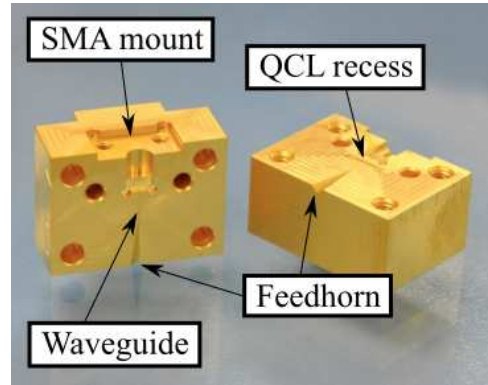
Micromachined 3.5-THz QCL waveguide block assembly, with the diagonal feedhorn, rectangular waveguide, mounting-point for an electrical SMA connector and the QCL-mounting recess indicated. In the completed assembly, the two half-blocks are co-registered to form the waveguide and feedhorn structures.
